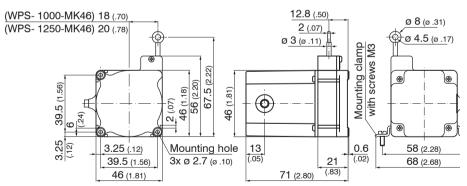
Dimensional drawing WPS- ... -MK46-CR, with potentiometer and radial cable, dimensions in mm (inches), not to scale
